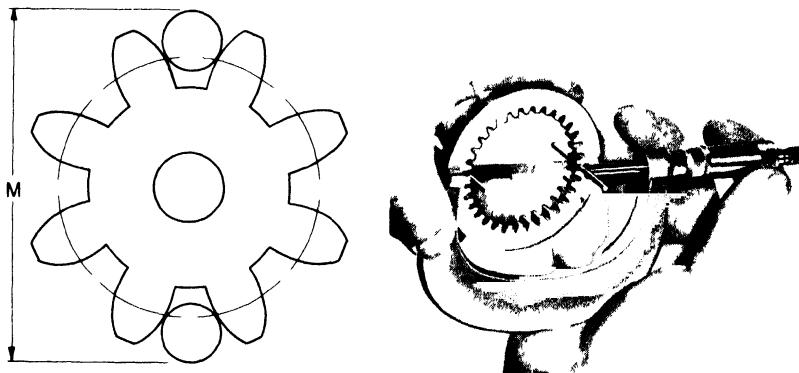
(Left) Set-up used when the pitch diameter or tooth thickness of a gear is to be checked with measuring rolls or wires. Fig. 17. (Right) When wires are used in measuring an internal gear, they may be held in place by a metal support strip as shown.
